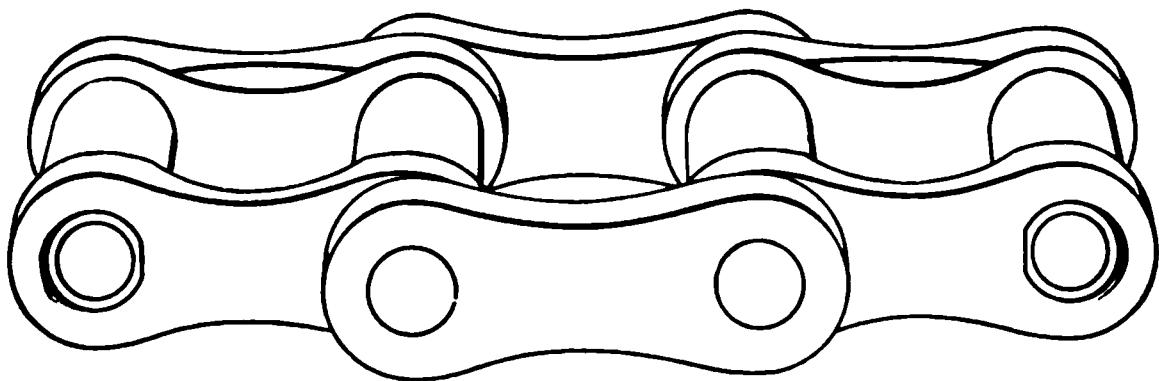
Section of a driving chain, showing arrangement of the rollers and side links.
